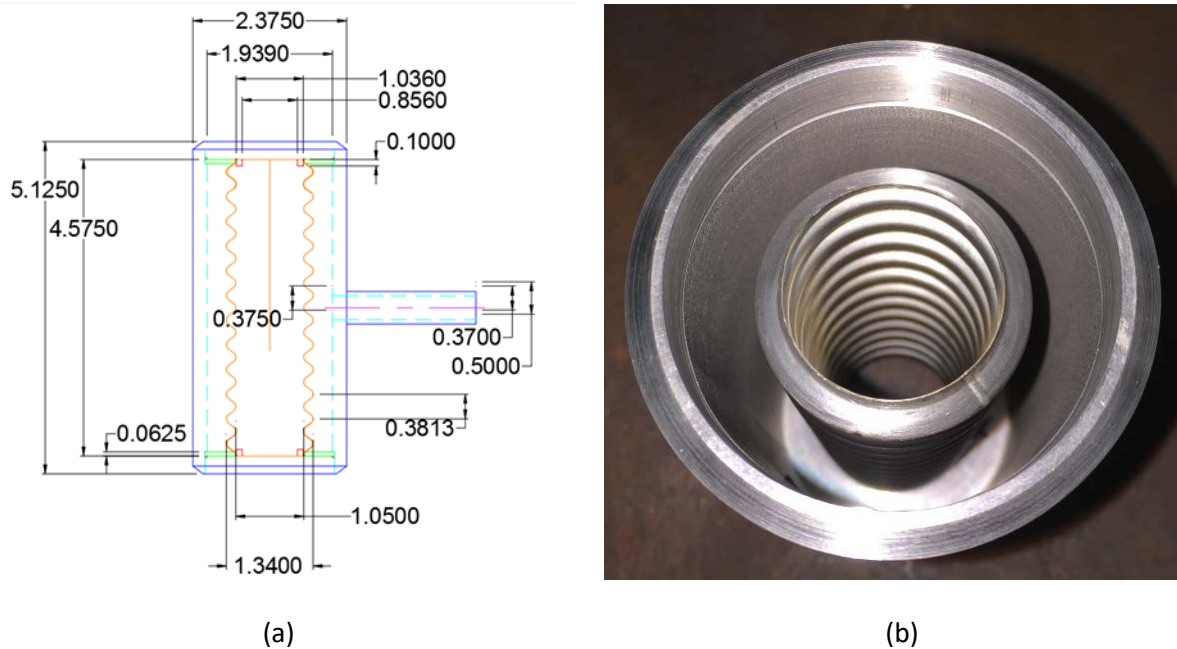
(a) Sand insulation realistic test section design, (b) picture of inside of test section showing bellows wall and outer shell.
